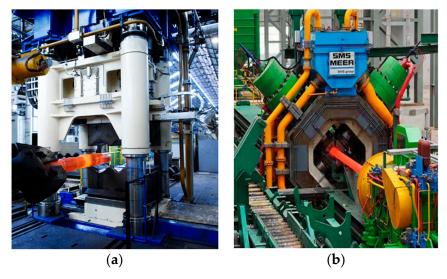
Forging process of hollow axle:(a) open-die forging process; (b) radial precision forging.
